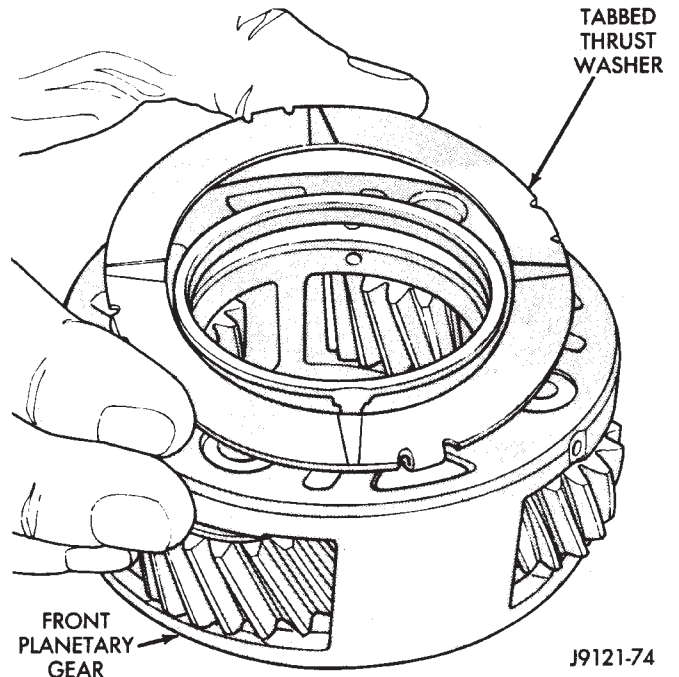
Installing Thrust Washer On Front Planetary Gear
